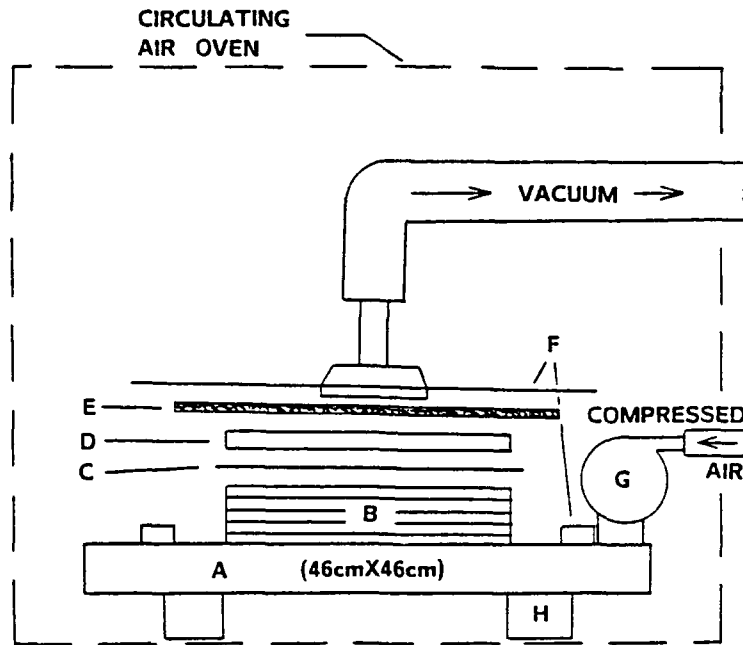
Tooling and layup for the VAVCP process; a) aluminum tool plate, c) release film, e) breather cloth, g) vibrator, b) carbon/epoxy preform, d) aluminum caul plate, f) vacuum bag and sealant, h) rubber mounts.
